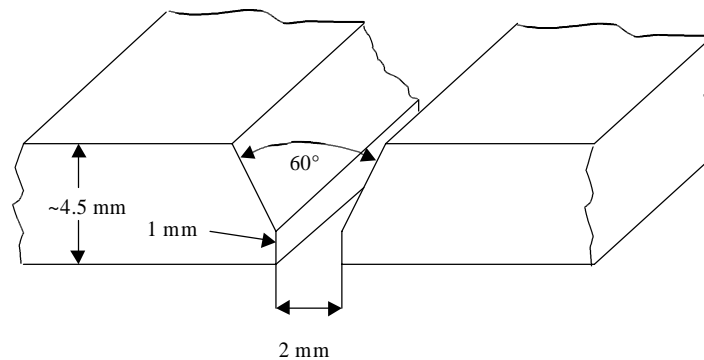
Groove geometry for butt welding of extruded profiles.
